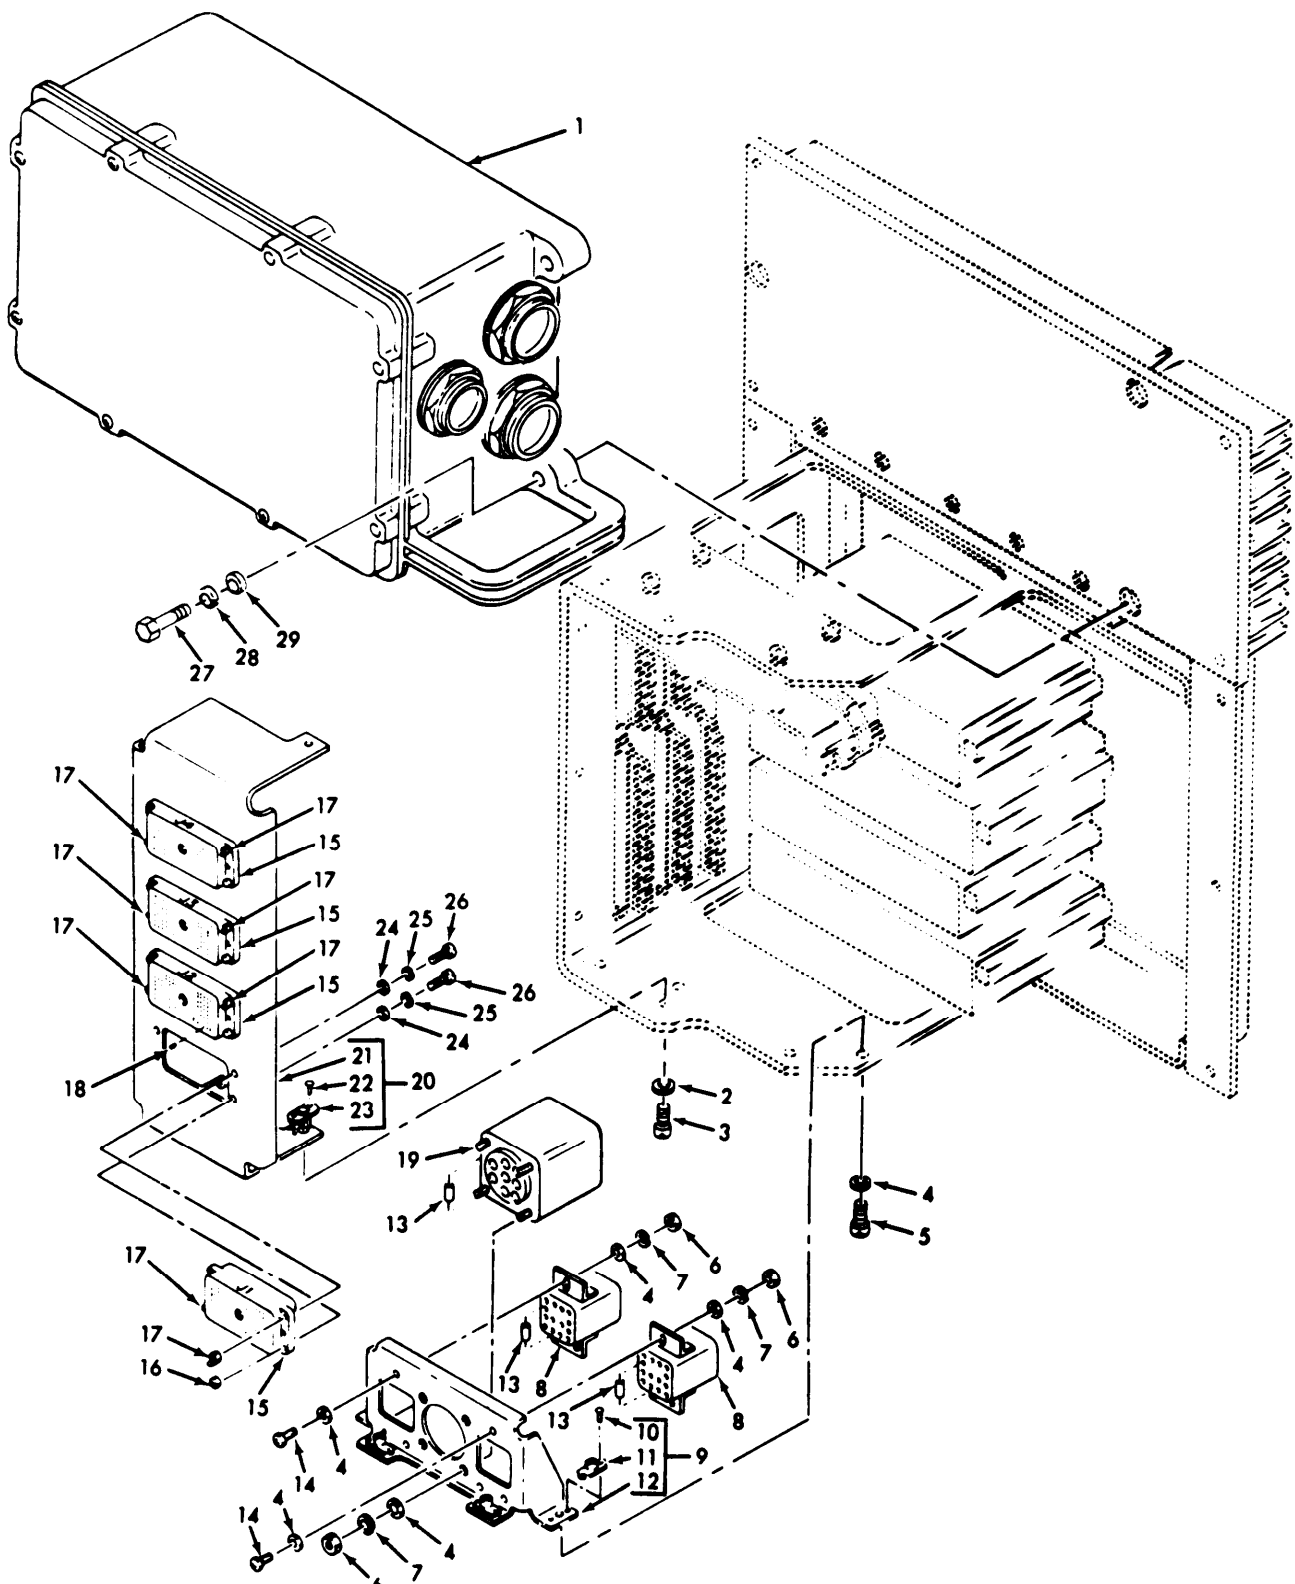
POWER MODULE ASSEMBLY A6 COMPONENTS PARTS
